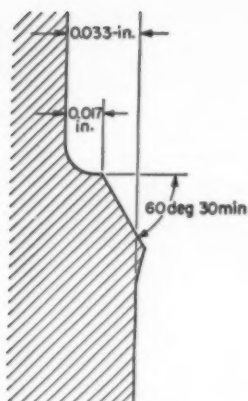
Magnified section profile of groove wall of test assembly in Fig. 2 after shear failure.
